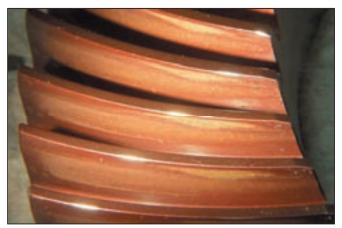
Spiral-bevel gear tooth contact after tests. Formated design.
